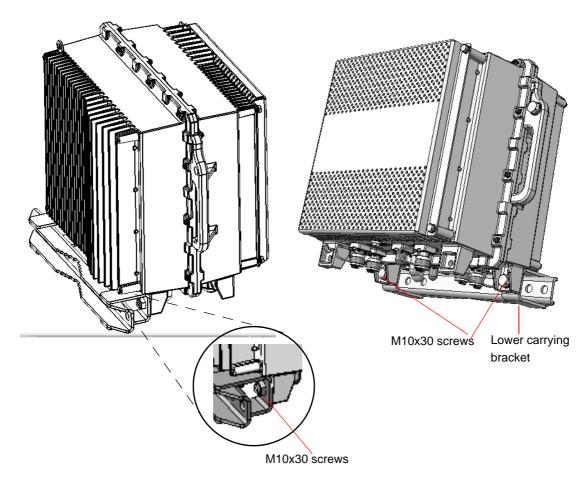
The Lower Carrying Bracket Assembled on the ODU
